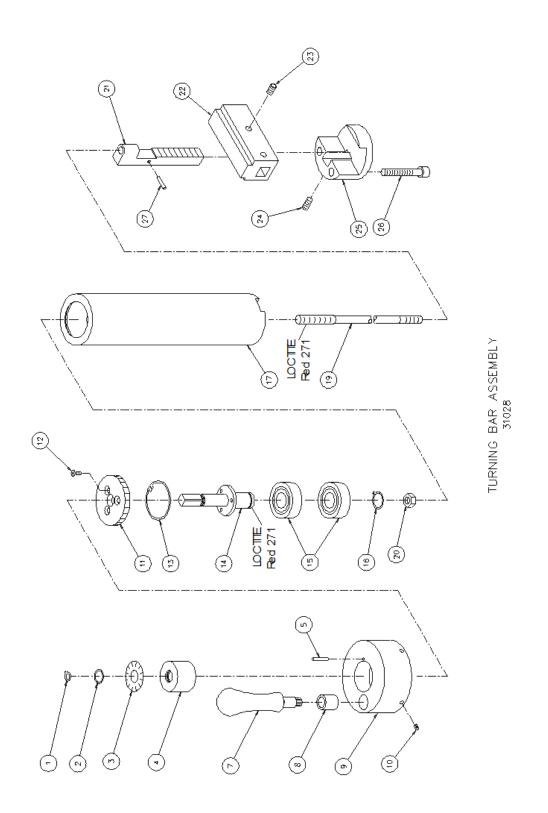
TURNING BAR ASSEMBLY (P/N 31028)
